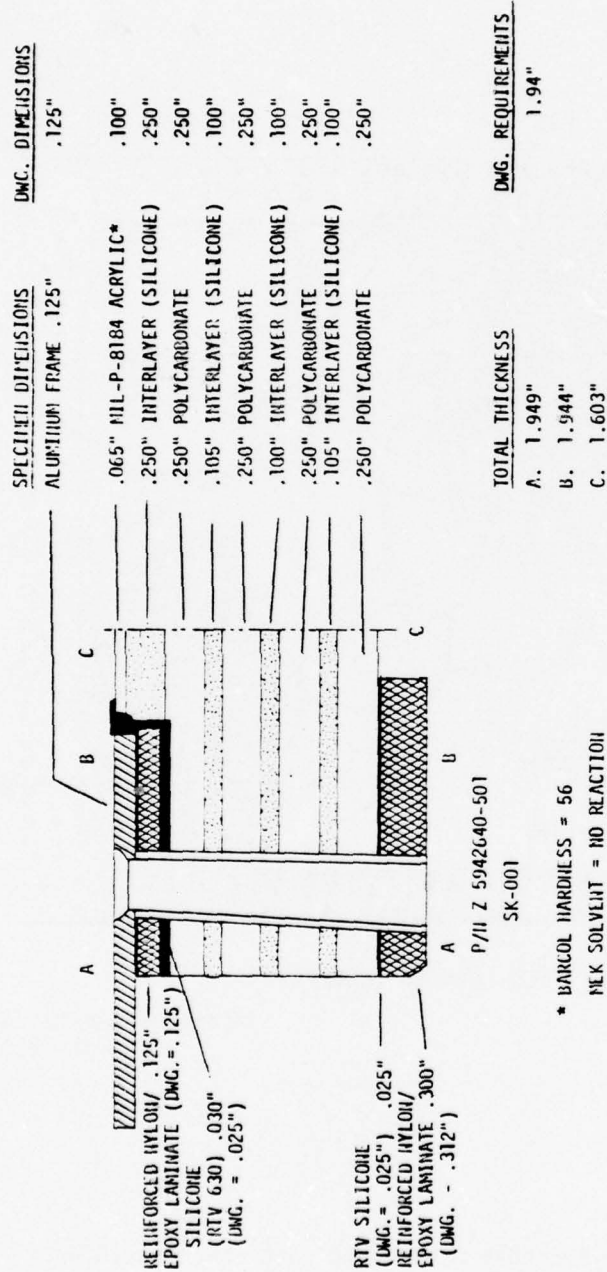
Material identification and dimensional verification, test specimen Z5942640-501 (SK001).
